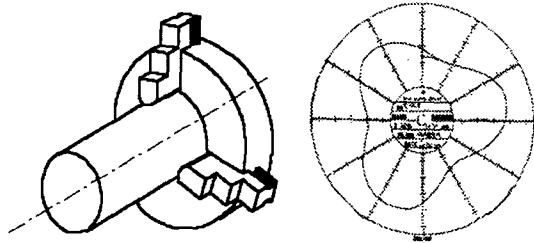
Cutting of cylindrical workpiece with 3 jaw chuck and out-of-roundness due to 3 jaw chuck
